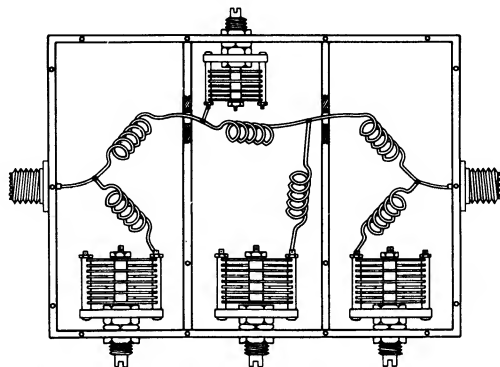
Top view showing the arrangement of the parts in a three-section, series-derived, low-pass filter. The top and bottom plates of the shield box are not shown. When these plates are bolted into position, the shield box completely encloses the components. The shield box should be bolted to the transmitter cabinet where the transmission line emerges.
